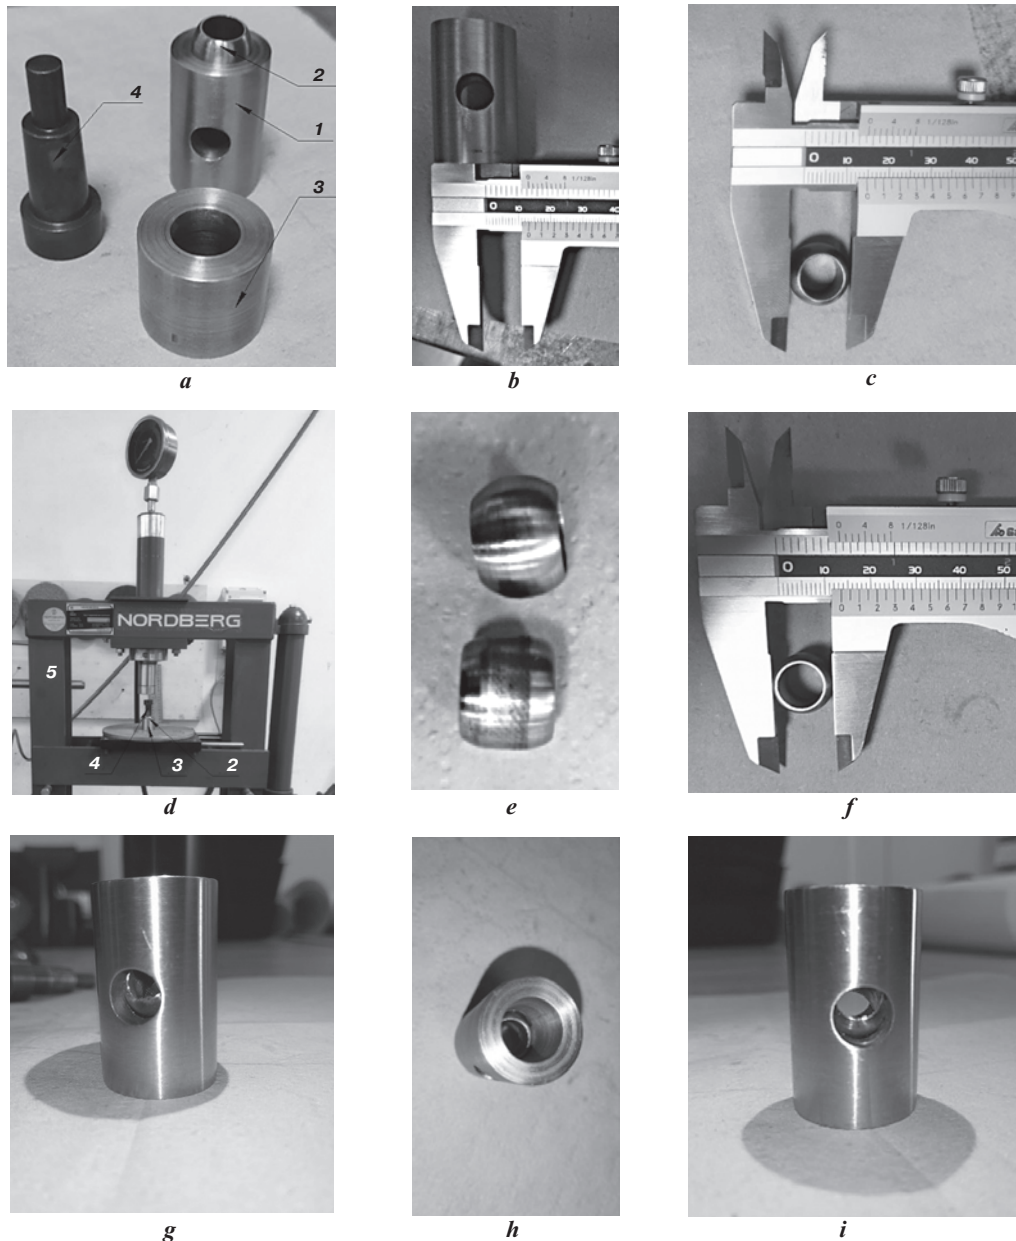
Installation of a spherical-shaped plug in a body, with the preliminary setting of the ball shape by special tooling: 1 – body; 2 – ball; 3 – bushing with a conical hole; 4 – rod; 5 – press; *a* – ratio of the ball to the body hole and special tooling bushing-rod; *b* – smaller diameter of the spherical groove $\varnothing 13,3$ mm; *c* – ball-shaped plug before deformation in austenitic phase state of $\text{Ni}_{55,9}\text{Ti}_{44,1}$ alloy with shape memory effect with diameter $\varnothing 14,7$ mm; *d* – the process of pulling a ball-shaped plug after cooling in liquid nitrogen to the temperature corresponding to the martensitic phase state of $\text{Ni}_{55,9}\text{Ti}_{44,1}$ alloy with thermoelastic phase transformations through the conical bore of the bushing on a hand press; *e* – comparison of shape features of a ball-shaped plug before and after broaching; *f* – ball-shaped plug that has been deformed in the martensitic phase of the $\text{Ni}_{55,9}\text{Ti}_{44,1}$ alloy, which exhibits shape memory effect with diameter $\varnothing 13,35$ mm; *g, h, i* – the ball-shaped plug is installed in the designated seating area of the body, followed by heating to the temperature at which the $\text{Ni}_{55,9}\text{Ti}_{44,1}$ alloy undergoes an austenitic phase transformation. This process incorporates shape memory effects, resulting in the restoration of the original shape and dimensions, corresponding to the austenitic phase state (operational characteristics) prior to deformation (photo by authors)
